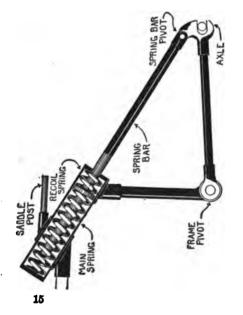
REAR SUSPENSIONS WITH COIL SPRINGS
